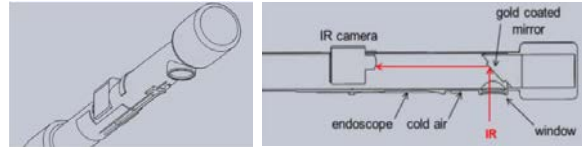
Borescope design; CAD model (left) & cross-section with parts (right) [8]
